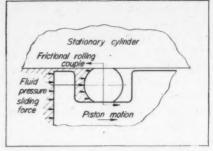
Forces tending to move O-ring seal in its groove on a sliding piston
